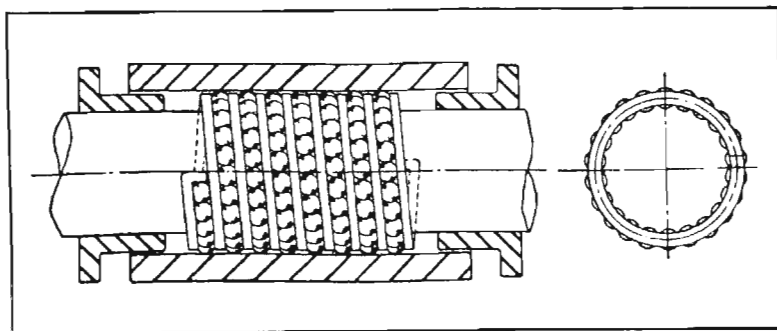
Bantam Construction Ball Bearing Capable of both Rotation and Axial Reciprocation.
